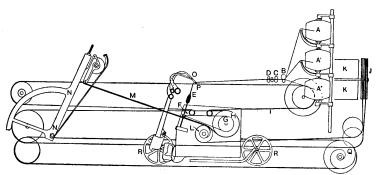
Worsted Mule Section.—A,  $A_1$ ,  $A_2$ , French drawn rovings ready for spinning; B, jack drafting rollers; C, carriers; D, front drafting rollers; E, spindle carrying spun yarn; F, wharl on spindle from which band passes to tin drum G; H, drum which conveys motion through the cord I, from the twist pulley J, in the headstock K, to tin drum G; L, a catch scroll which receiving a variable motion from the quadrant NN, through the chain M, gives the spindles the correct rotation to wind up the yarn for building a firm cop during the running in of the carriage at the same time that the faller wire O and counter-faller wire P direct and tension the winding up of the yarn, this being further controlled by the action of the "copping plate," which controls the up and down movement of the faller wires.
